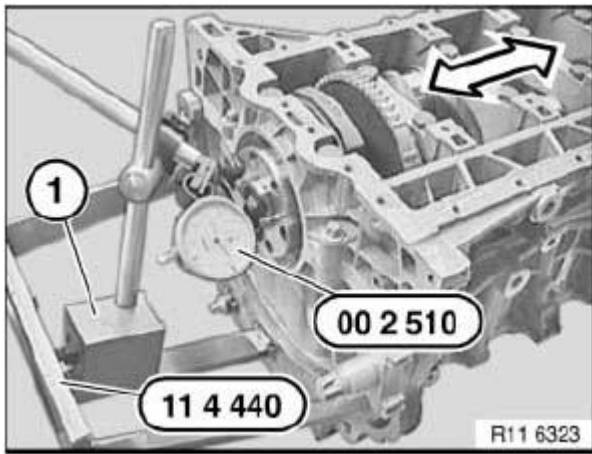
Identifying Special Tool (00 2 510) And (11 4 440)
